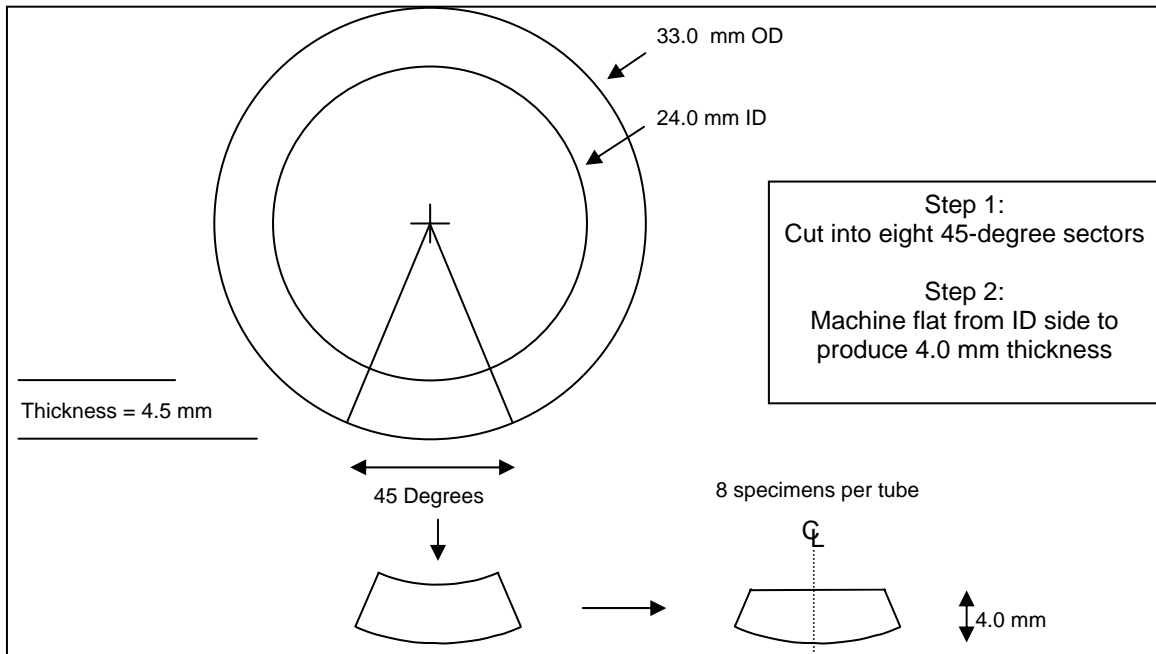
Schematic for the fabrication of sectoried tube flexure specimens.
